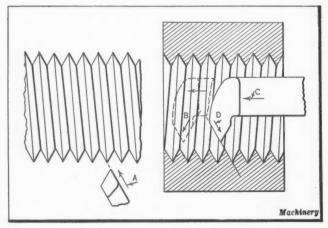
Diagram used to illustrate Method of Cutting Internal Threads
